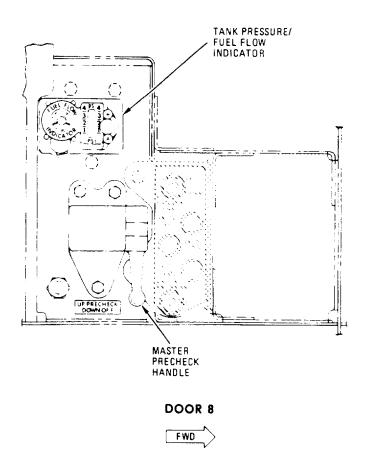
Transfer Leak Test Component Locator (Sheet 1 of 3)
